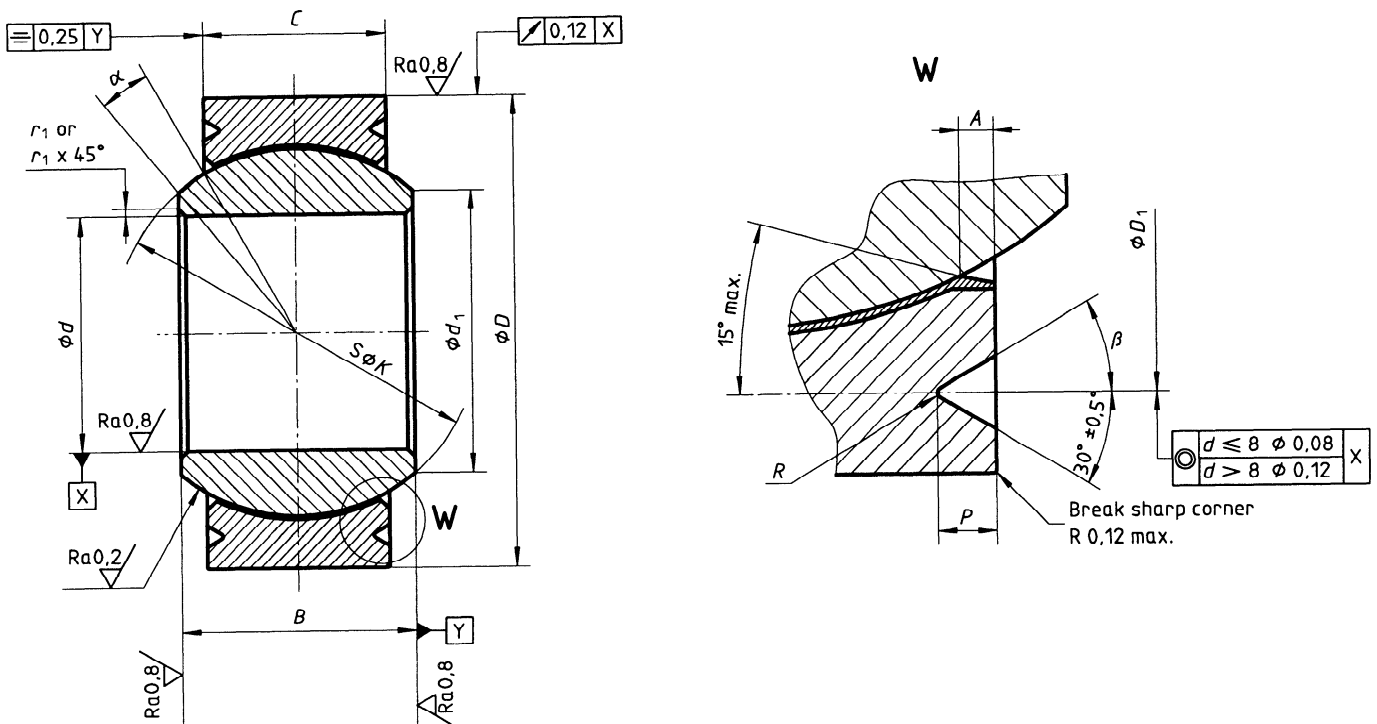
Spherical plain bearing with self-lubricating liner with face groove
